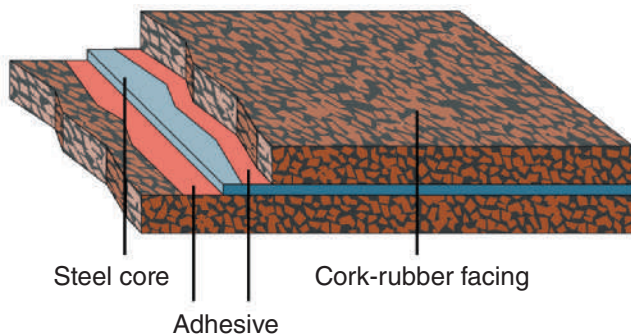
Composition of a cork/rubber gasket used mainly as valve cover, oil pan, and timing cover gaskets.
